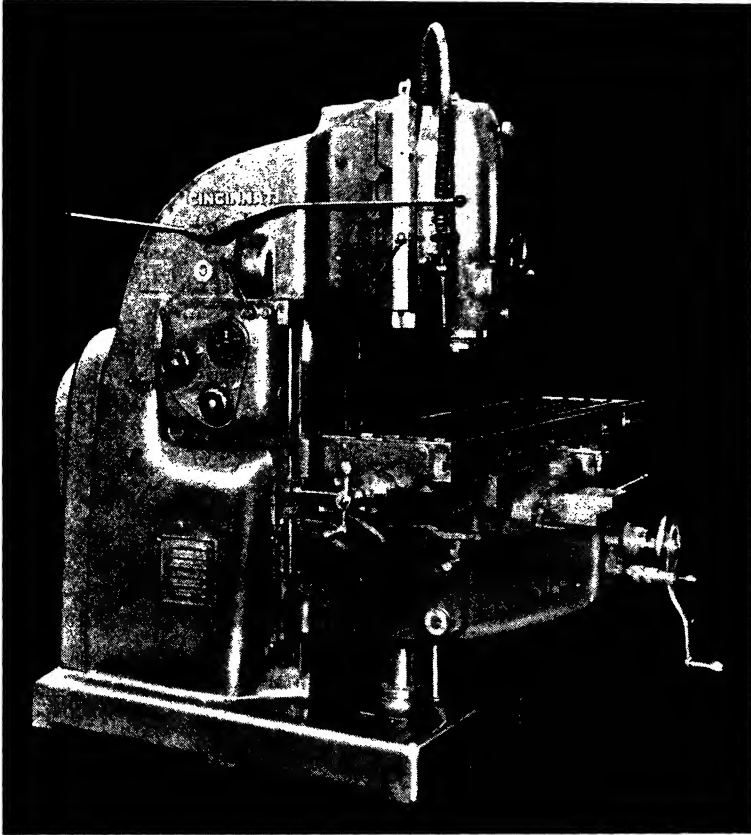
MILLING MACHINE: VERTICAL TYPE
